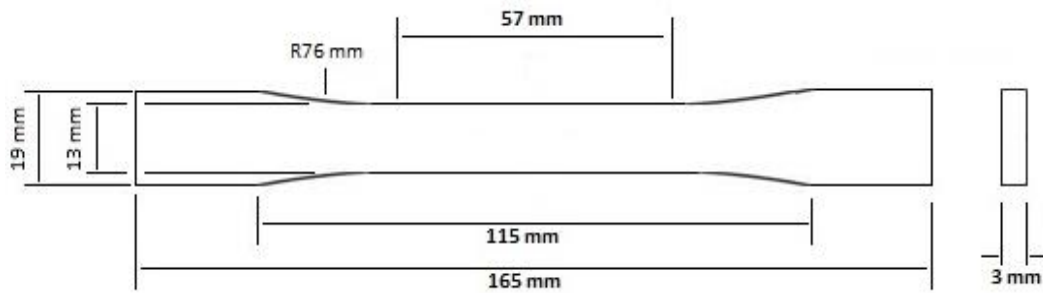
Dimensions of tensile test specimen (ASTM D638-03)
